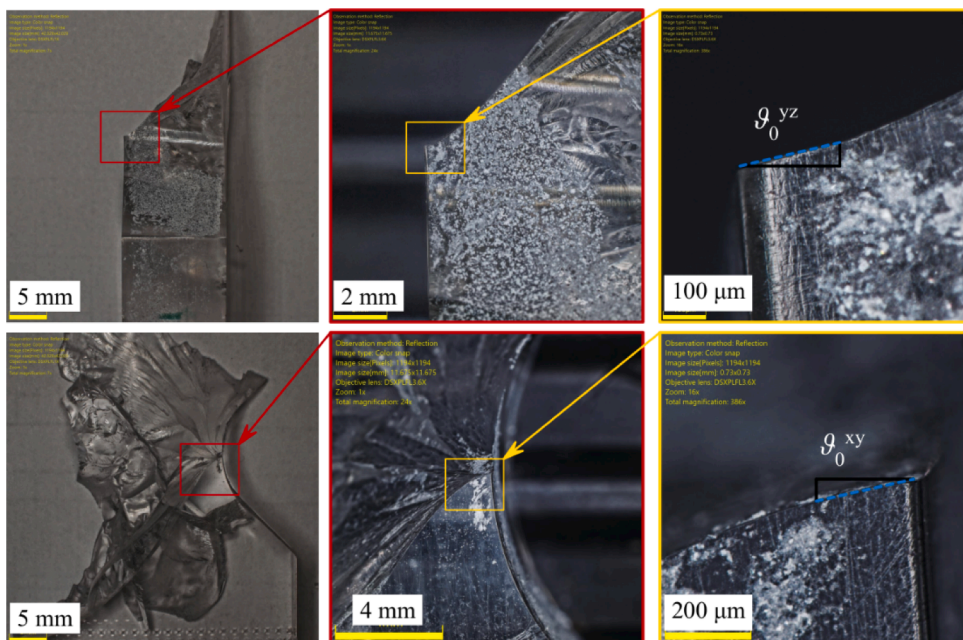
Microscopic measurements of the angular position of the edge of the crack initiation surface.
